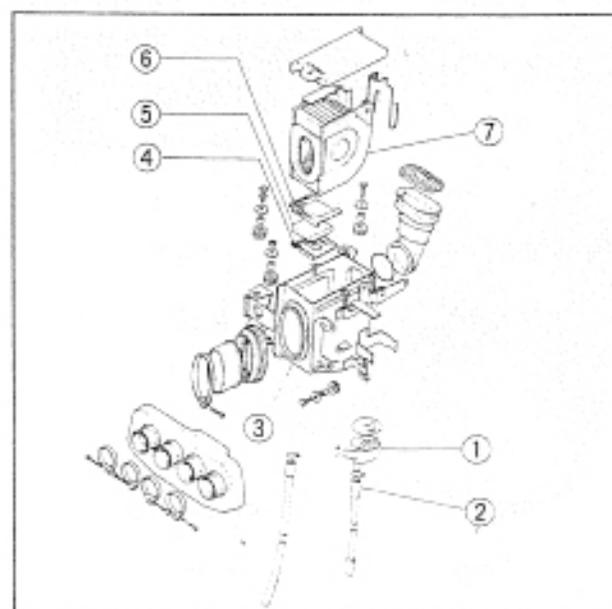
① Breather box ② Oil drain tube ③ Air cleaner case ④ Lower element holder ⑤ Breather element ⑥ Upper element holder ⑦ Air cleaner element
